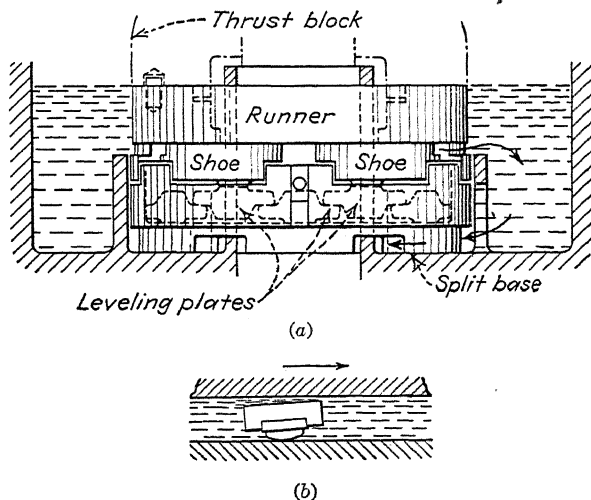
Kingsbury thrust bearing; (a) section of six-shoe vertical thrust bearing, showing oil circulation and main features of mounting; (b) diagram of tilted shoe.
